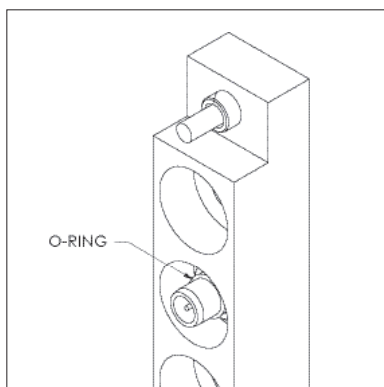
Figure B. The o-ring provides a bulkhead seal during receiver and ITA engagement.
